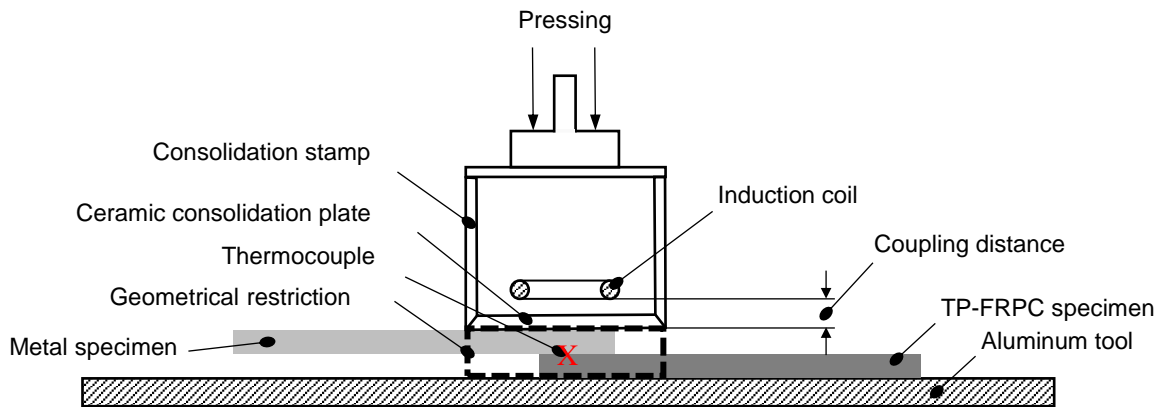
Schematic sketch of the discontinuous induction welding of hybrid lap shear specimen
